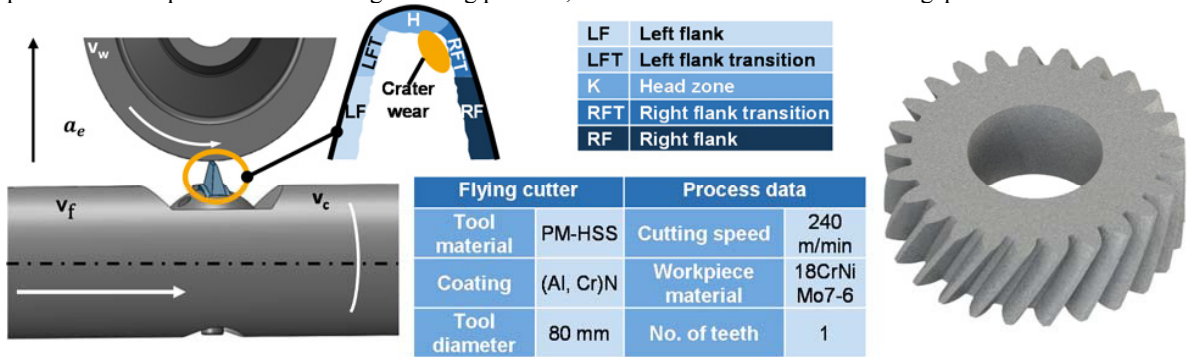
Experiment setup (left) and CAD image of the gear (right)
